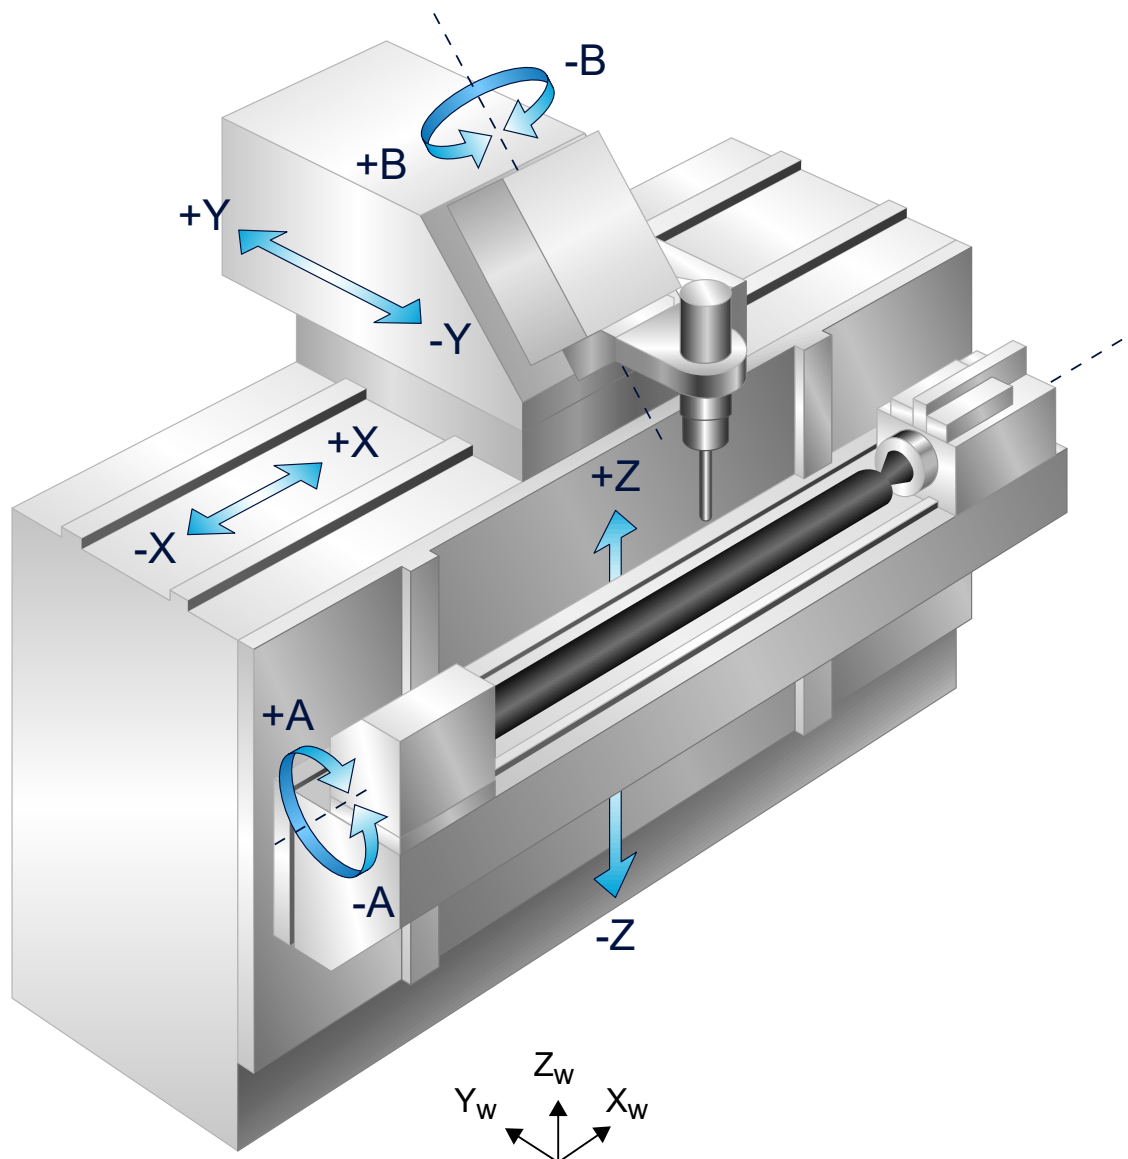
Axis configuration of the 5-axis machine with oblique angle head
